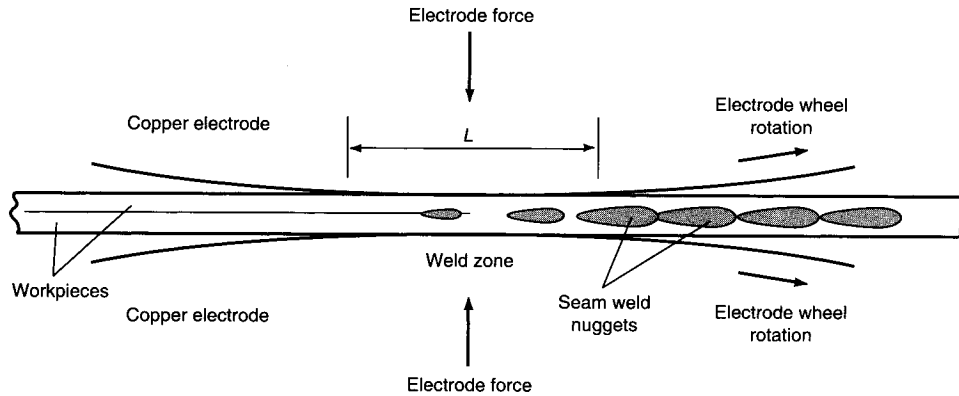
Schematic showing lengthwise sectional view of proper nugget development in the weld zone of a pulsed lap seam weld. The length of the contact head footprint, L , is sufficient to contain three nuggets under the wheel.
